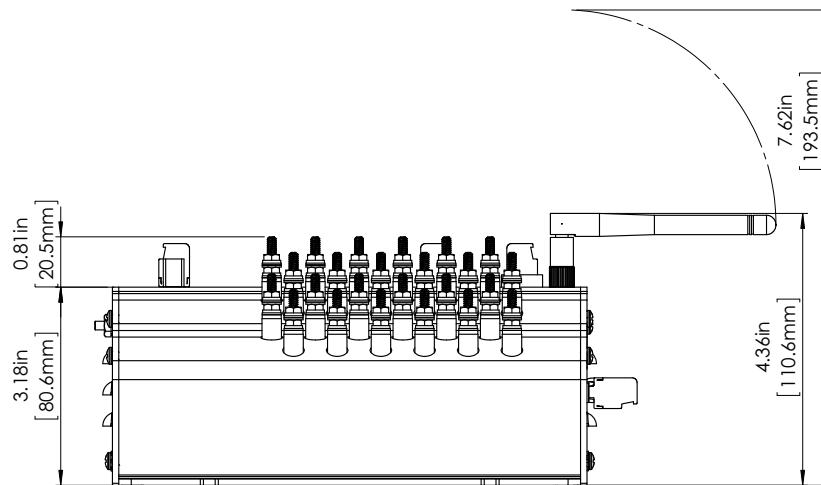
EPM 4600 Unit Side Dimensions
